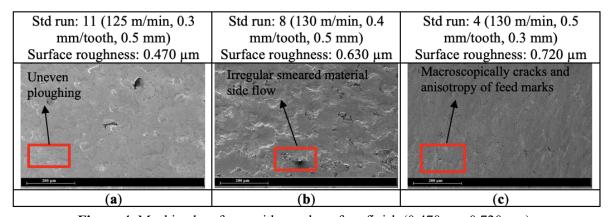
Machined surfaces with rough surface finish (0.470 μm-0.720 μm)
